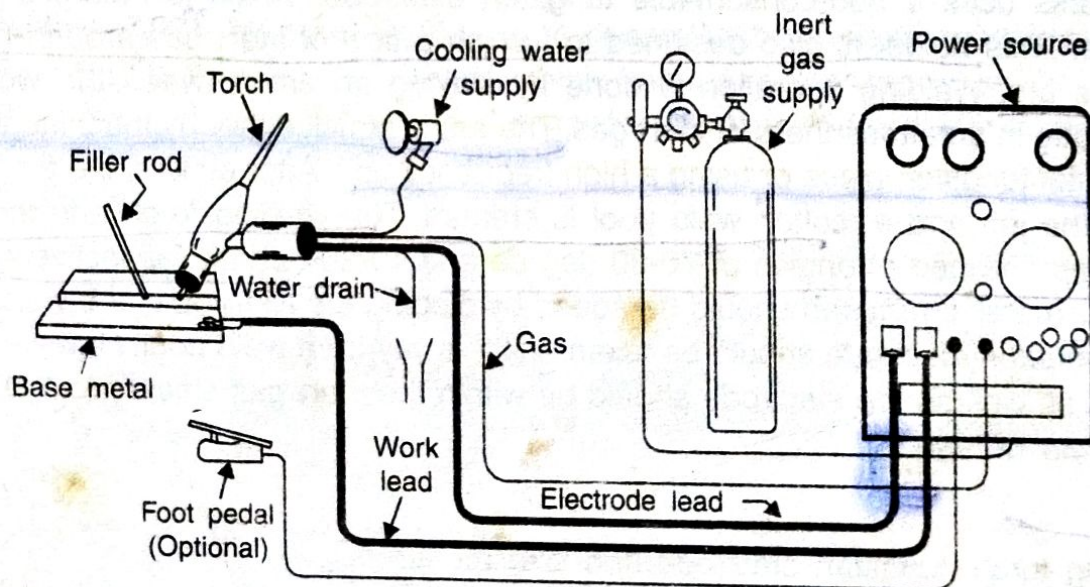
(b). Setup of Tungsten Inert Gas (TIG) Welding.
